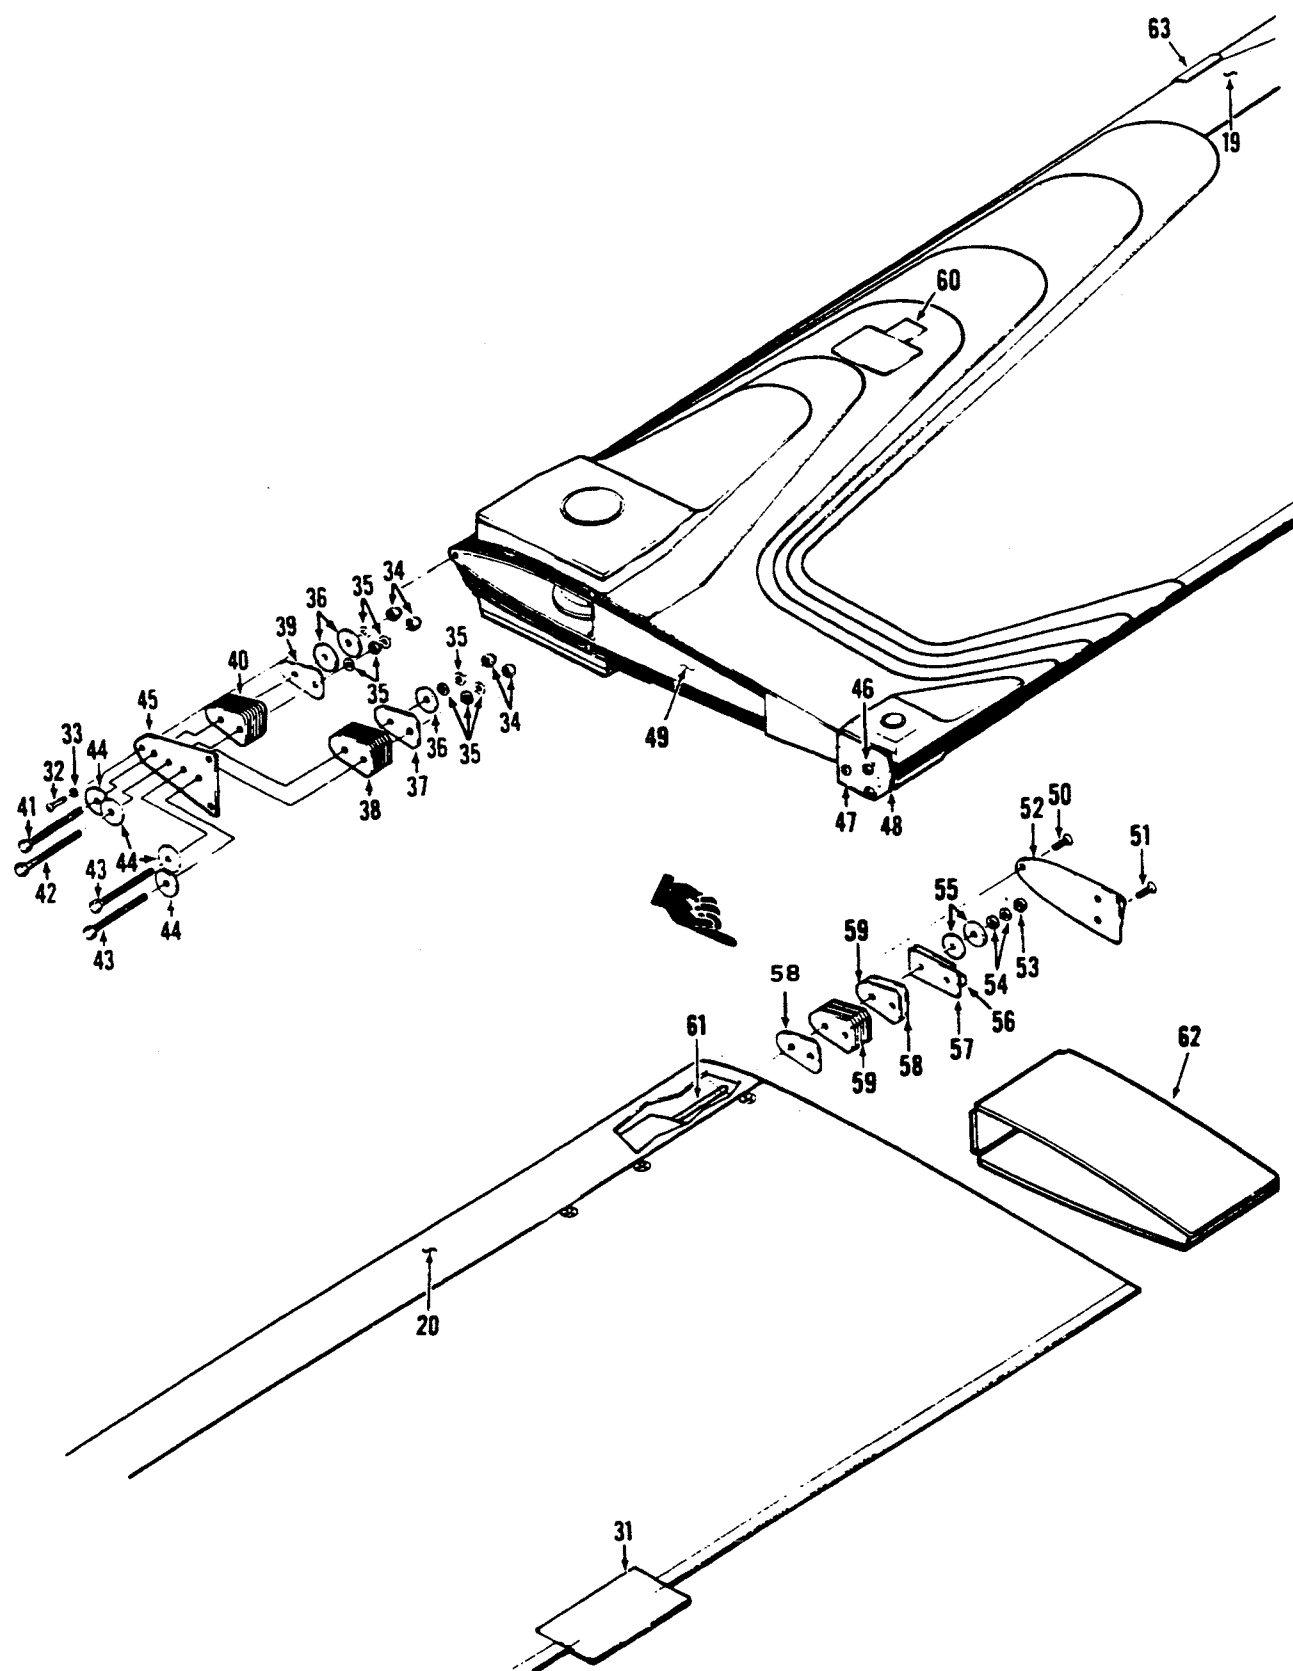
Main Rotor Blade Assembly (Sheet 2 of 4)
